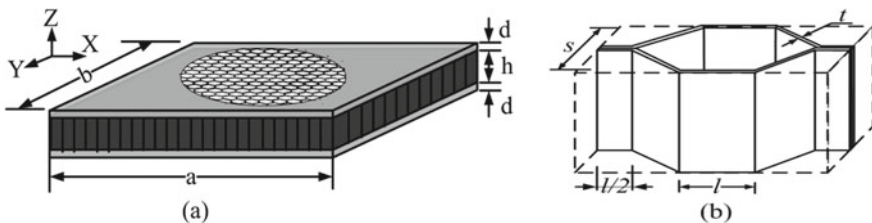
a Dimension of sandwich panel b Dimension and configuration of honeycomb core
